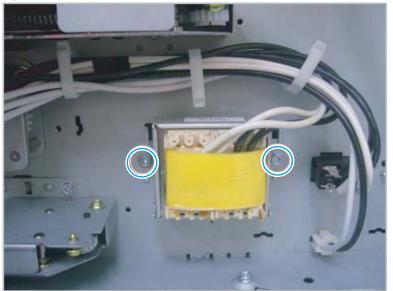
Remove the fuser drive and LVPS boards and cage
